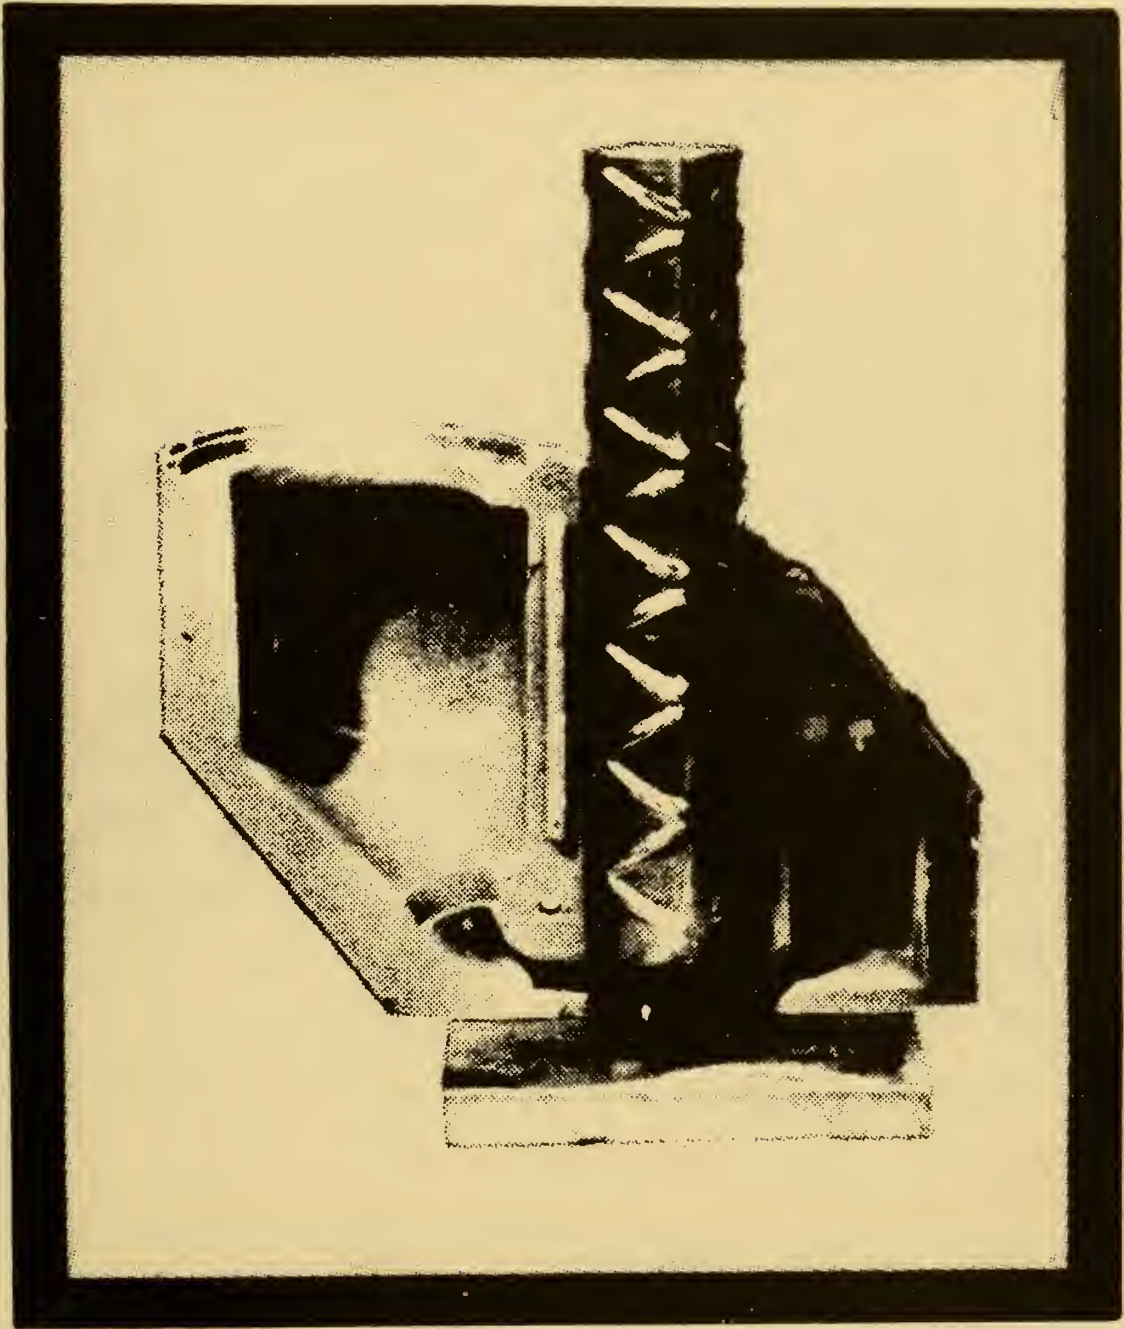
HALF SECTION OF BAR TO PLATE THERMIT WELDING KIT
